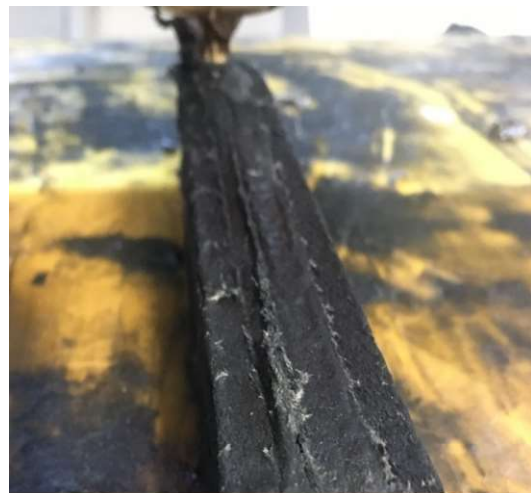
Tensile bar slab produced with a spindle speed of 120 rpm has material squeezing upward, a sign of over extrusion.
